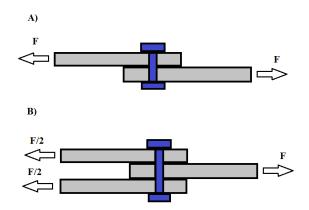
Cross sections of assemblies experiencing display of shear in a bolted connection. A) is single shear while B) is double shear.
